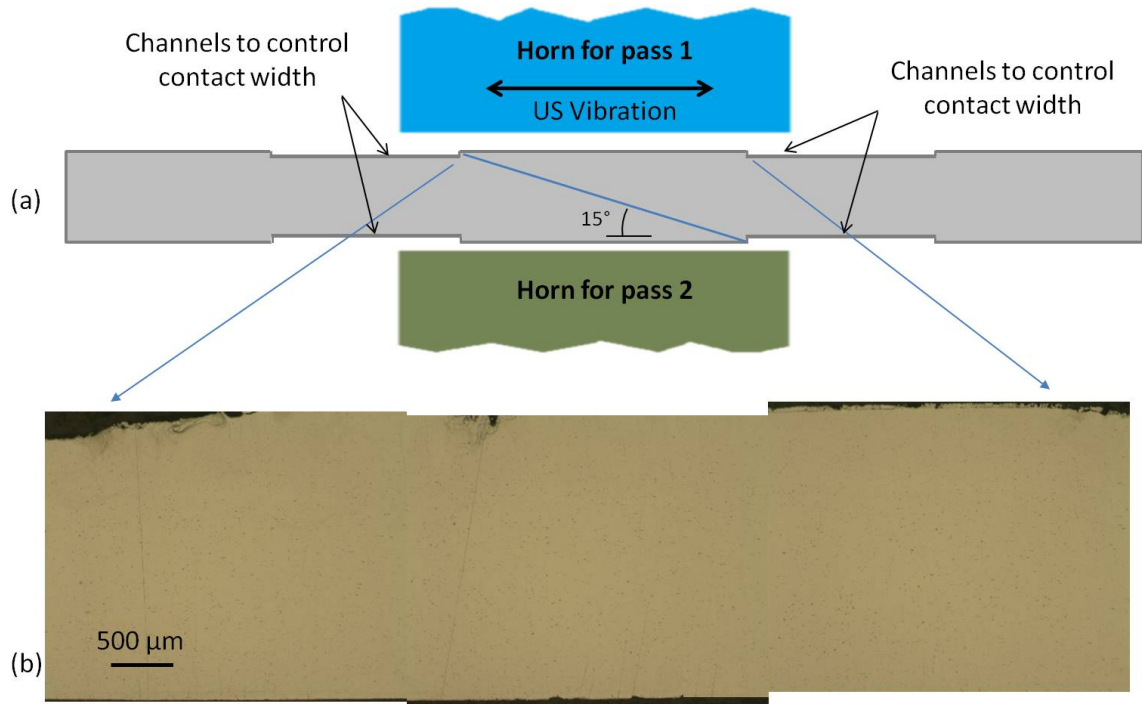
Scarf joint with welding on both sides: (a) schematic and (b) cross section.
